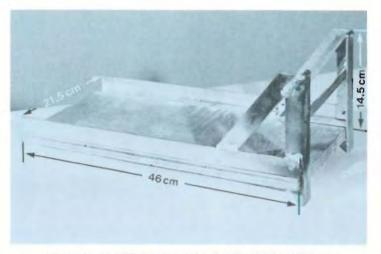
Auxilliary support bracket for Hughes 500; construction is of 1" welded aluminium on a 3/4" plywood base.
